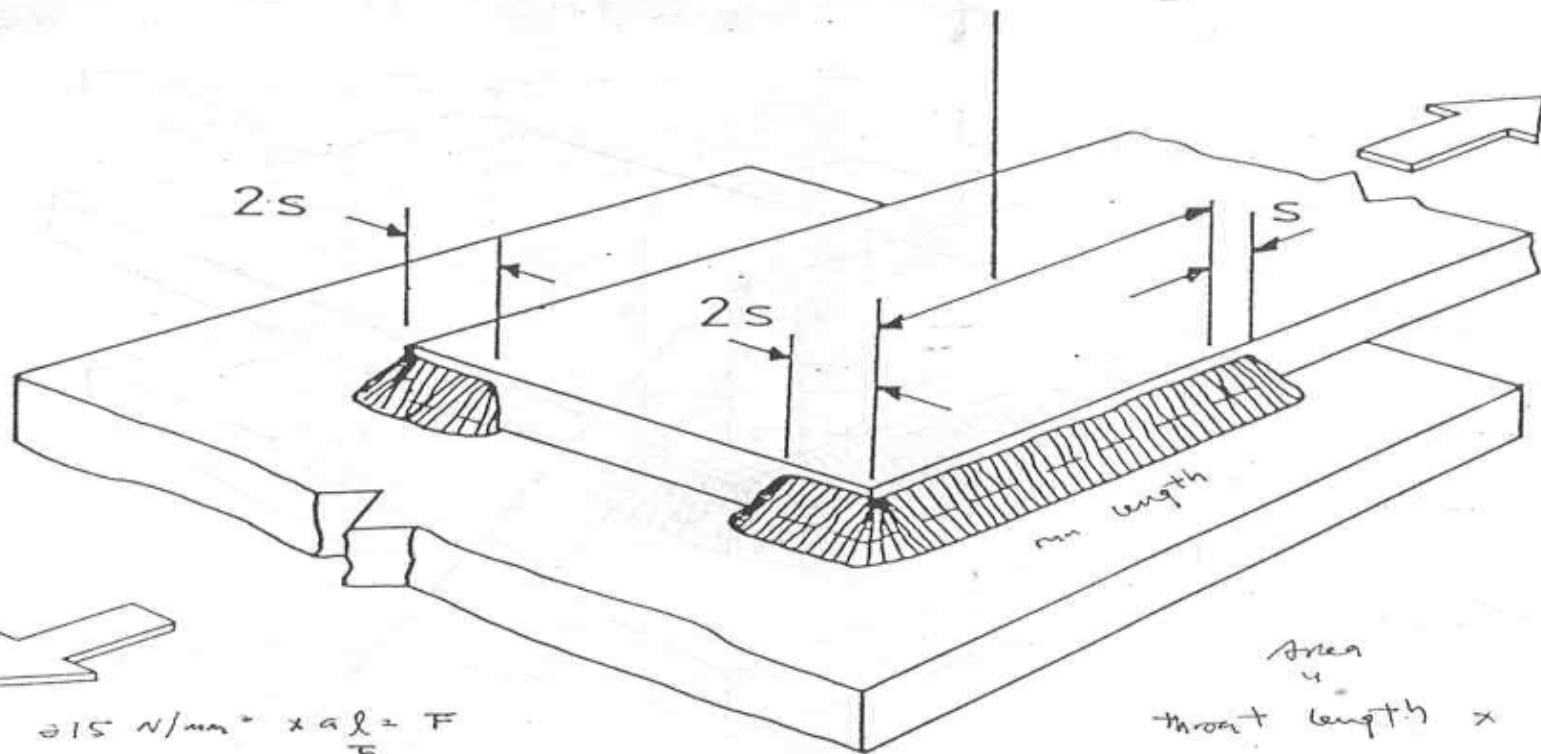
FIG. END (OR TRANSVERSE) FILLET WELD
